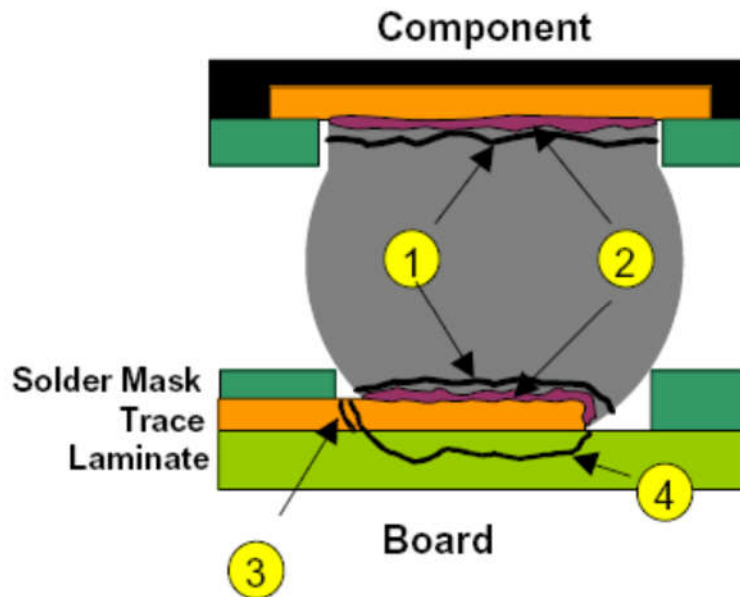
Major Failure Modes of Solder Joints at Board Level.
